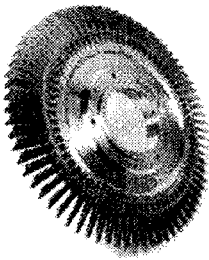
Typical assembly shape of blade and disk for small gas turbine disk
